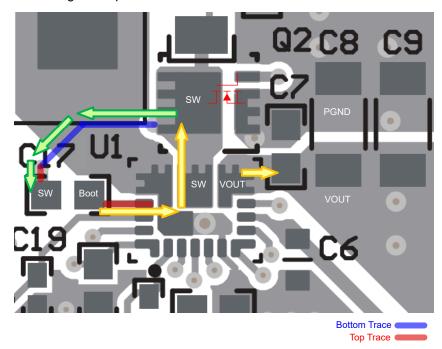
TPS61381-Q1 High Side Driver Layout Example
